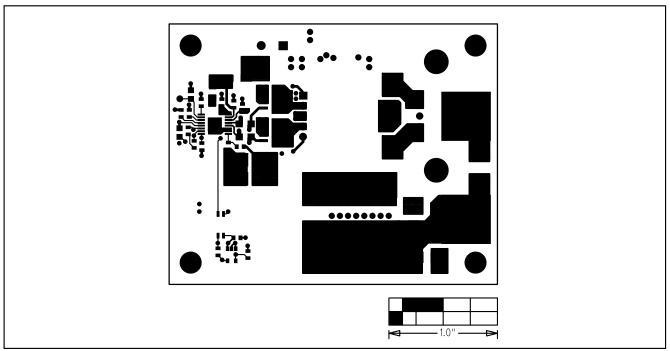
MAX5069A EV Kit PC Board Layout—Component Side
